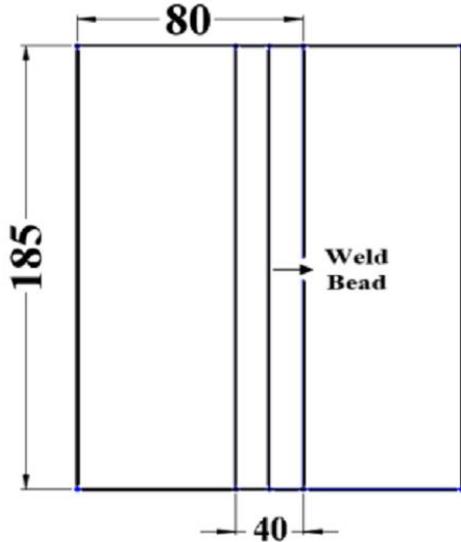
Schematic illustration of the fiber laser welded steel sheets.
